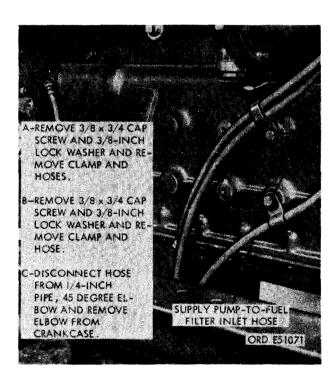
REMOVING OR INSTALLING FUEL AND OIL HOSES FROM ENGINE.
